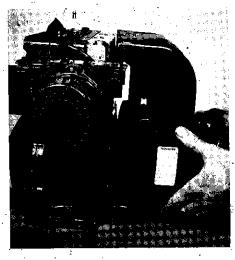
Slide blower housing off and clean out all grass, weeds, and dirt that might be in housing or on engine.
